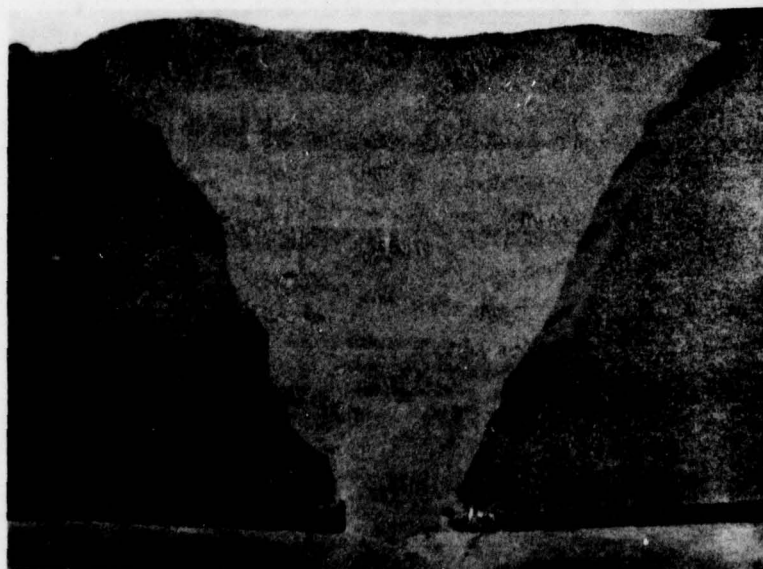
Typical cross-section of A516 shielded metal-arc weldments (1 in. [25.4 mm] thick).
